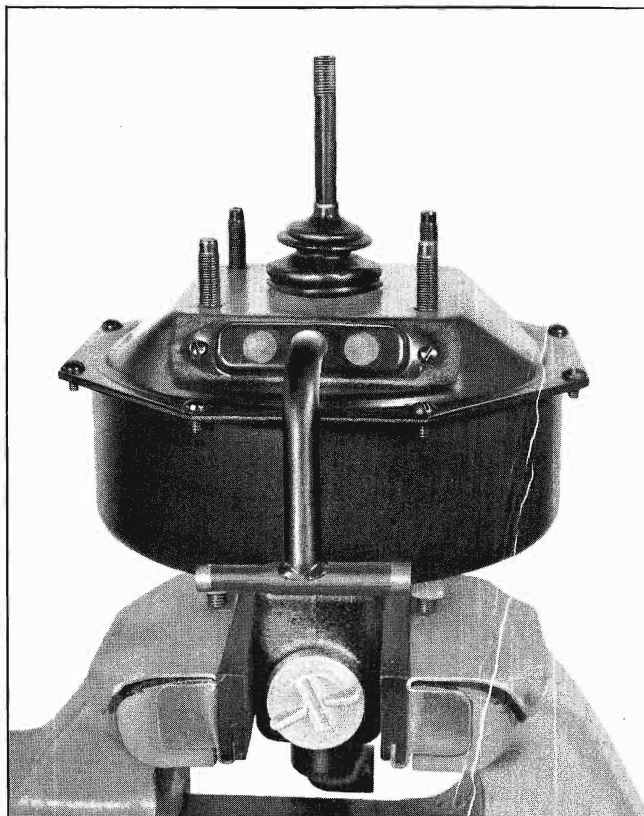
B-9 Bendix Brake Assembly Mounted in Vise
